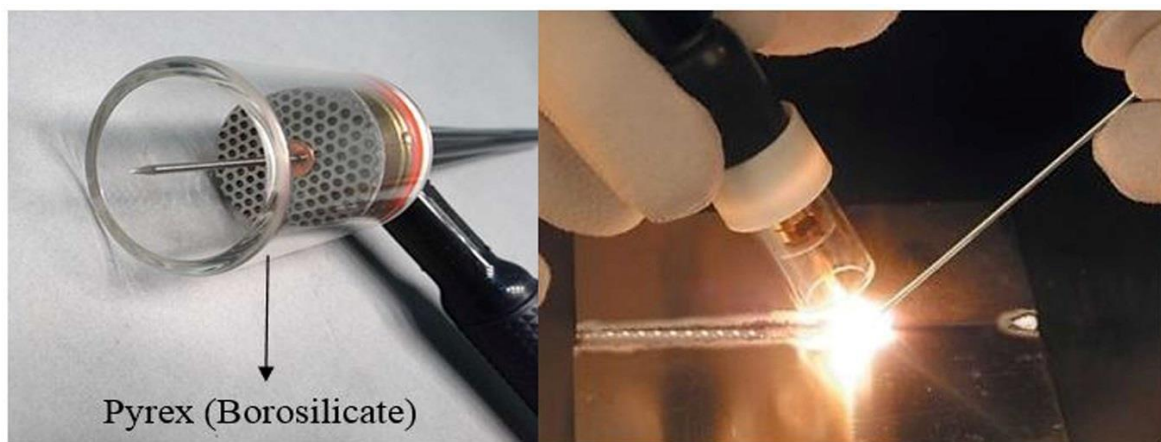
1: TIG welding torch and TIG welding operation [4]
